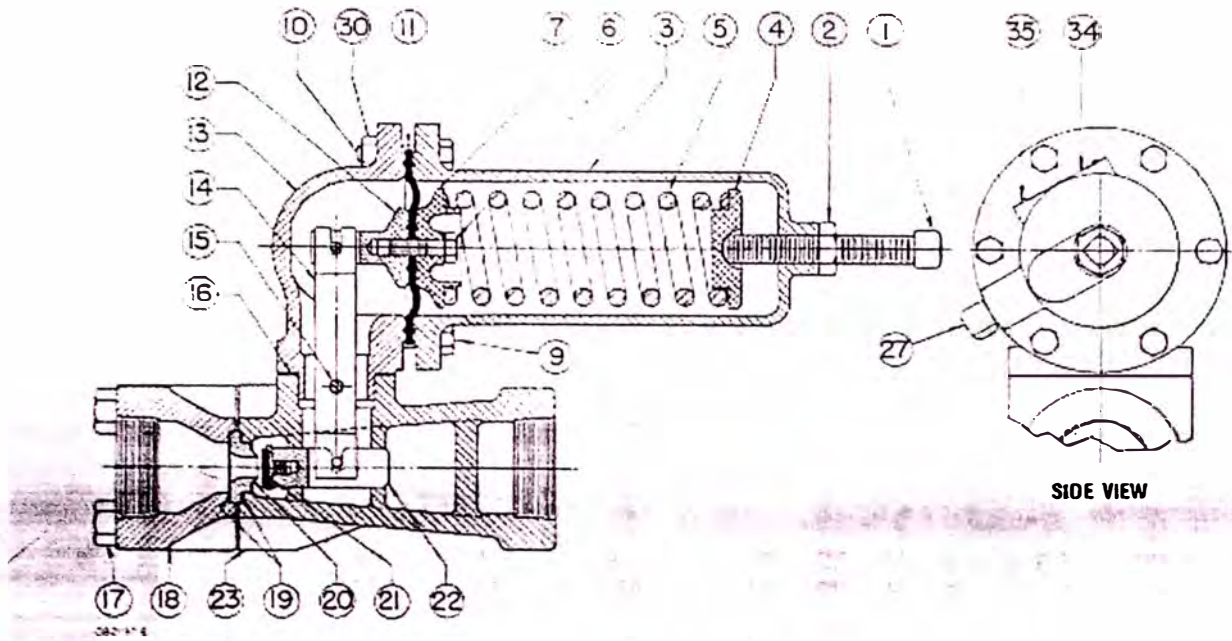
Spring-Loaded Type 630 Regulator—High-Pressure Construction
